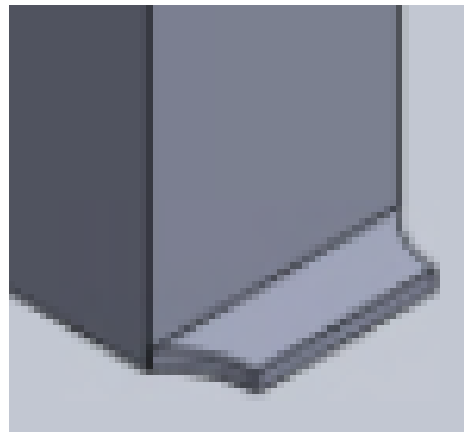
Legs on the end of 2 Battery Casing for Fixturing into Hull
